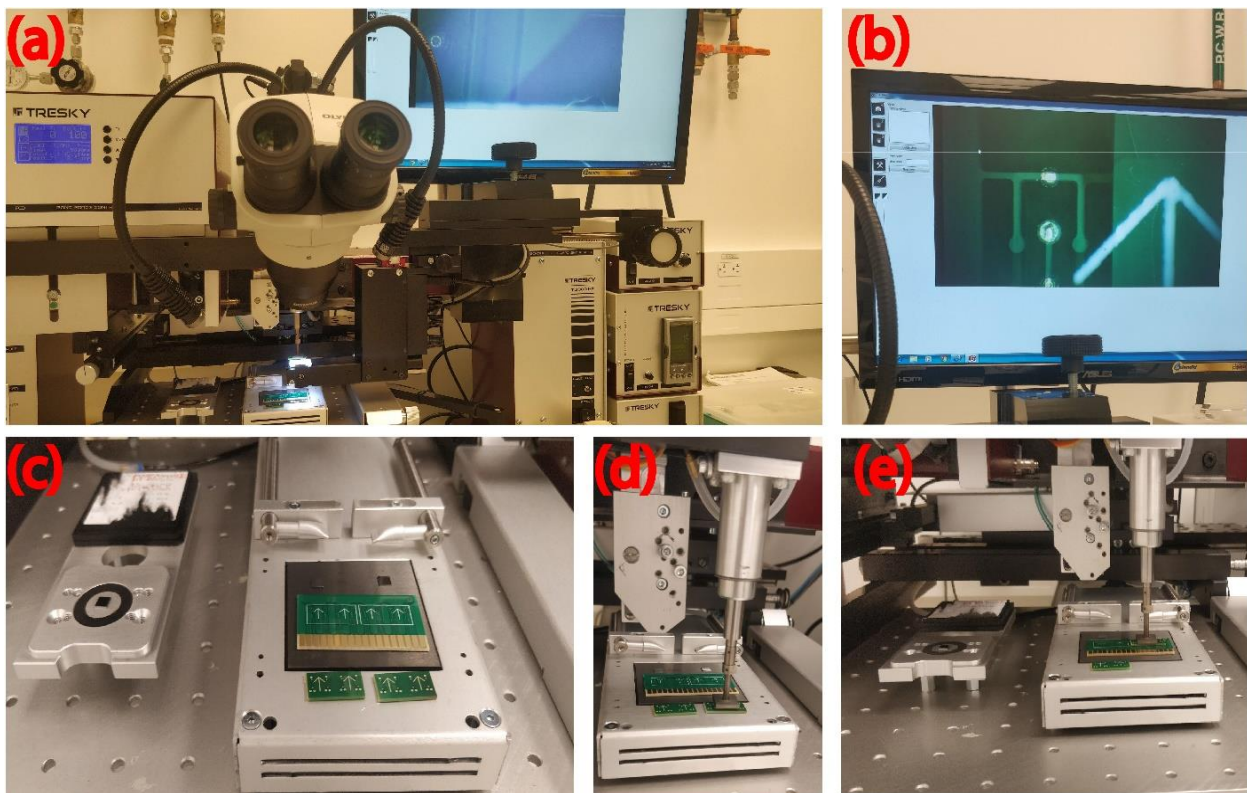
Tresky T-3000-FC3 die bonder machine, showing (a) machine platform (b) superimposed images of daughter- and mother- boards (c) motherboard placement on heating plate (d) pick and place tool (e) reflow process.
